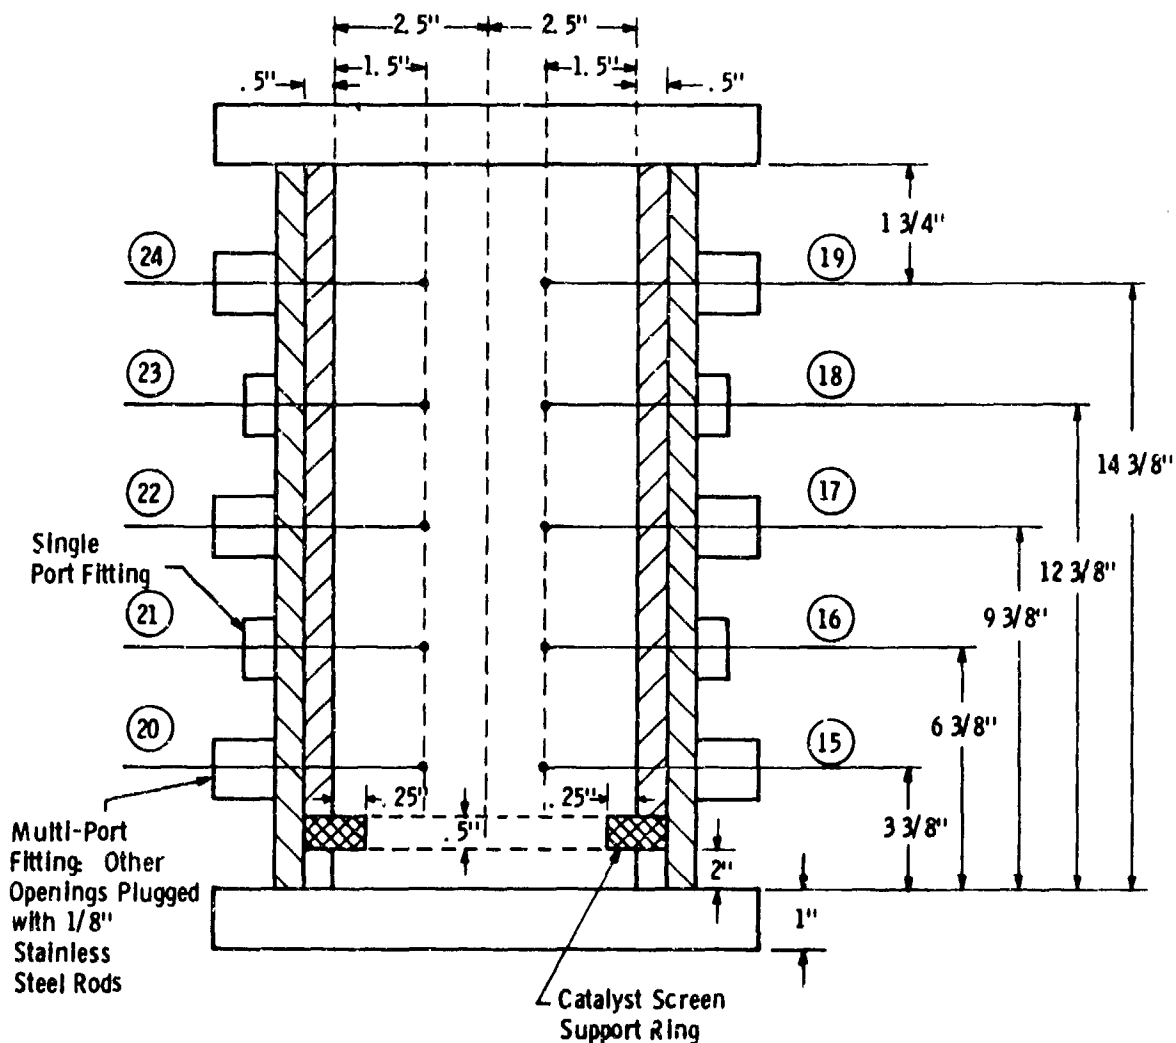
B -- Reformer Side View - Other Thermocouple Locations
